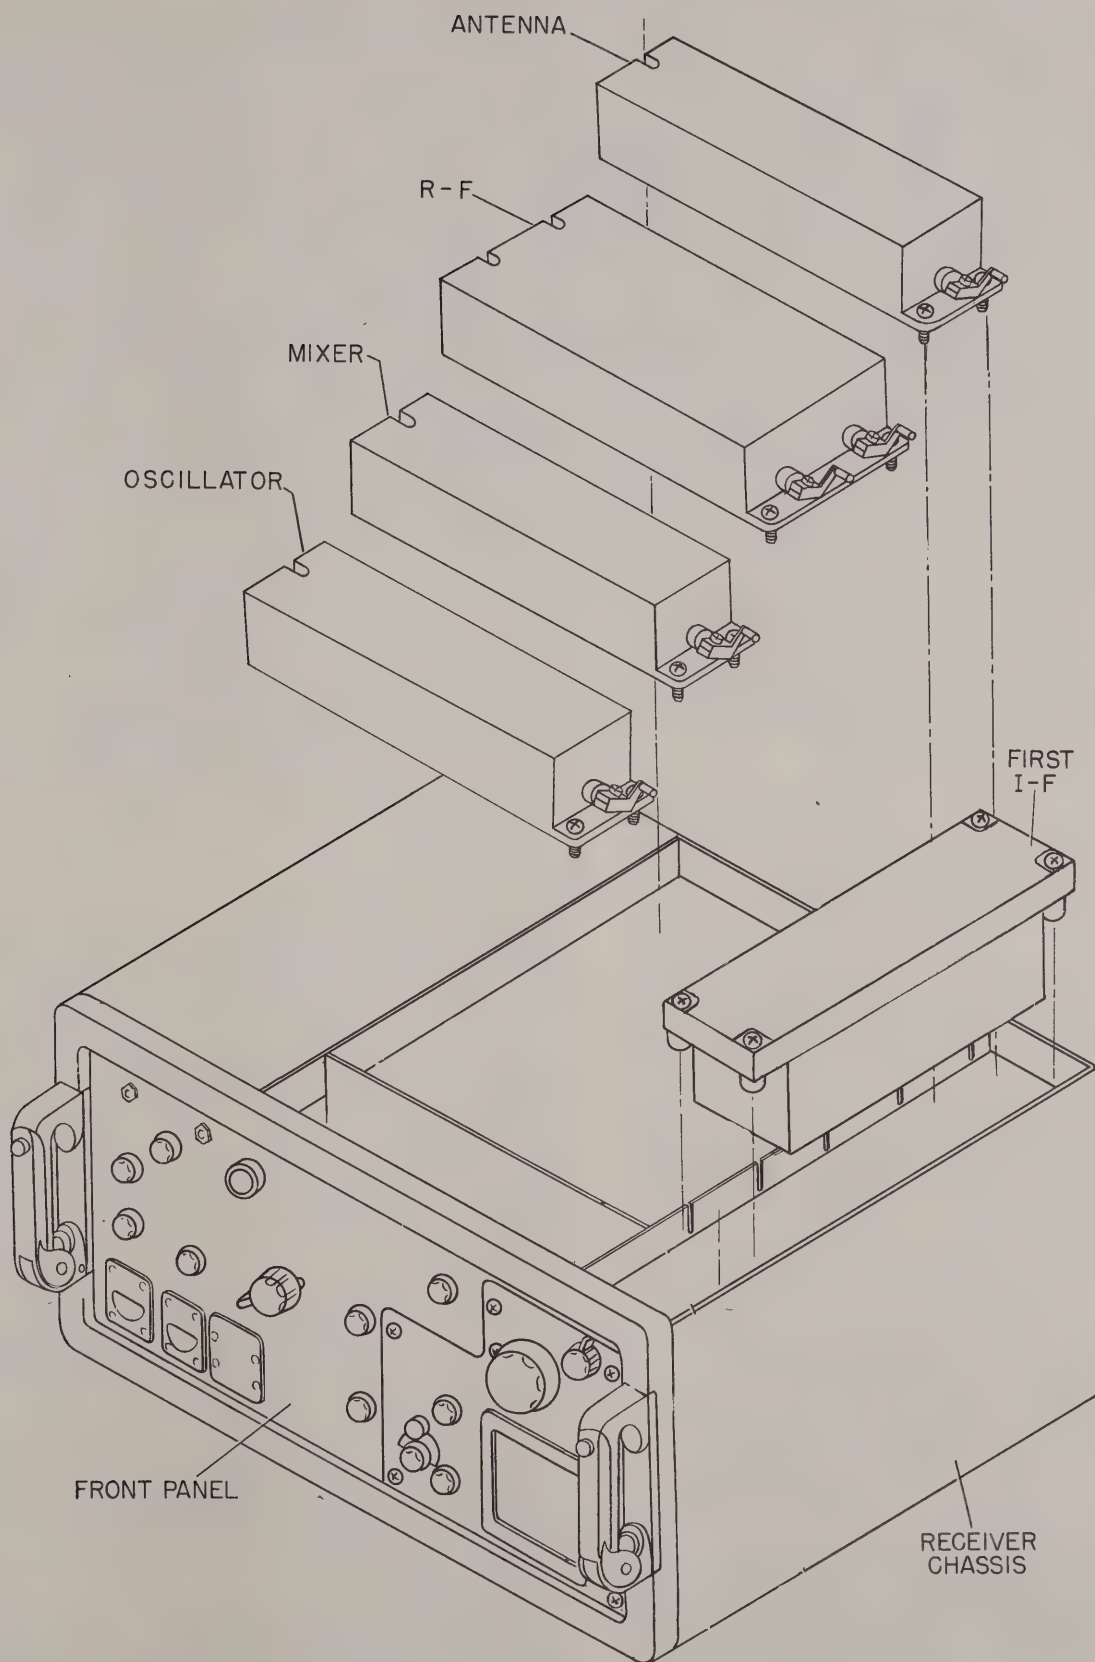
Removing and Replacing Assemblies on Bottom Side of Chassis
